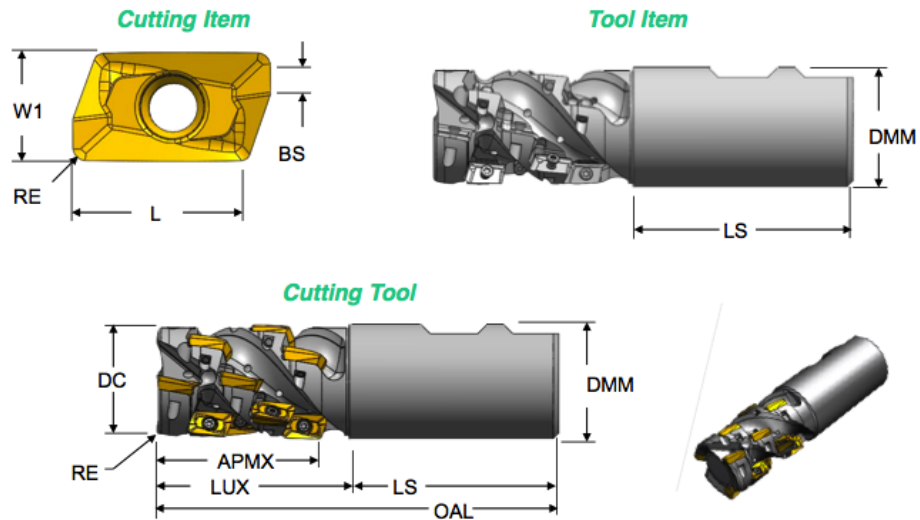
Cutting Tool, Tool Item, and Cutting Item
